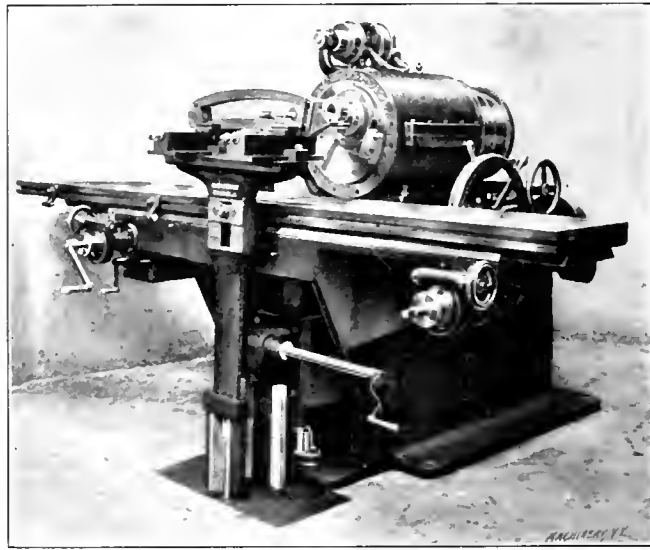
Grinding Links for the Reversing Mechanism of Locomotives.
